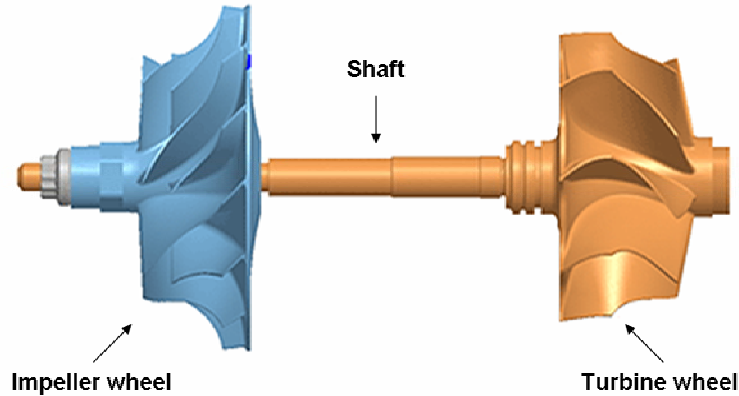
Turbine wheel, impeller wheel and shaft sub-assembly.
